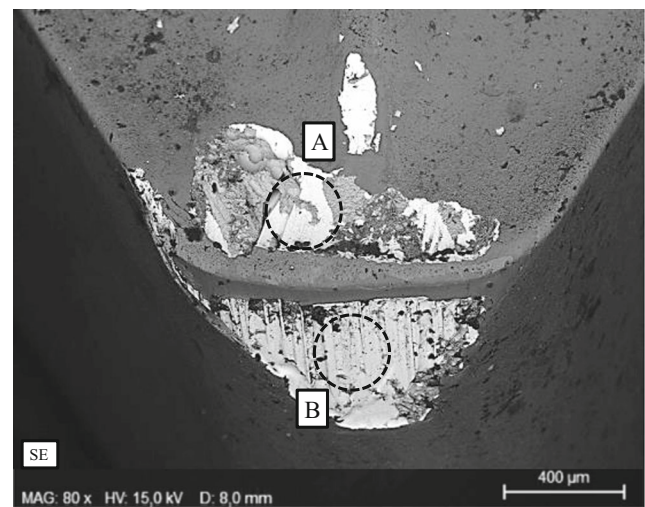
EDS of the cutting tool used in dry turning with cutting speed of 400 m/min, obtained by SE mode
